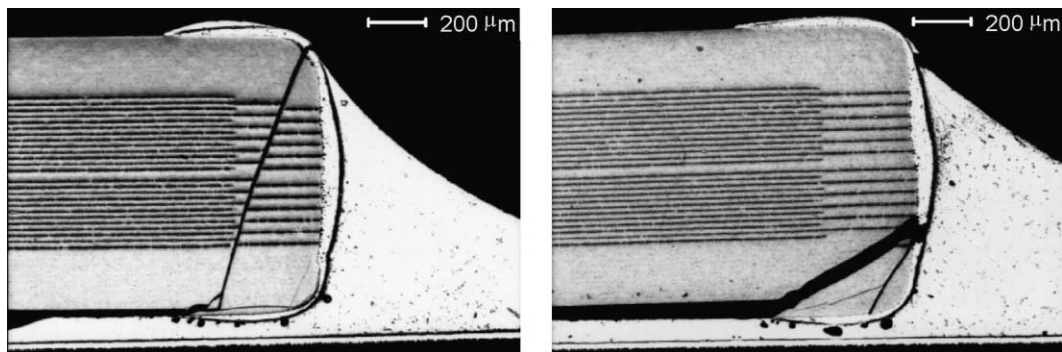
Typical cracks in the polished cross-sections of soldered MLCs under bending load stress.
